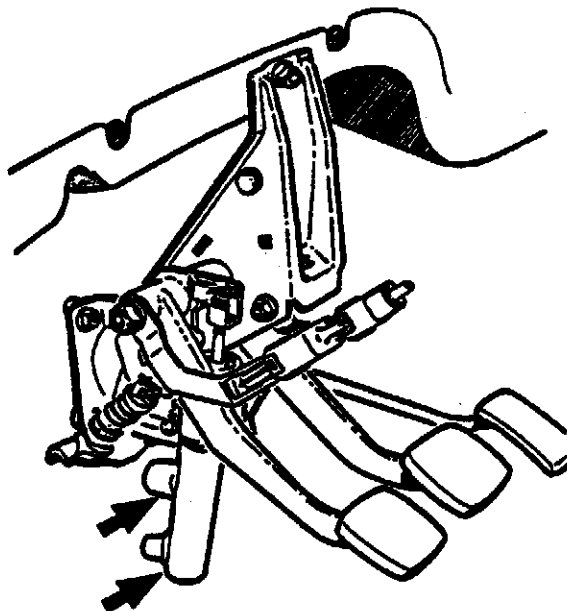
Inspect the Clutch Master Cylinder for signs of fluid leakage.
